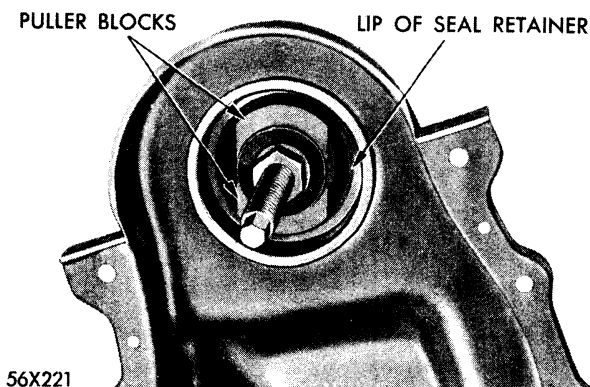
Puller Blocks Expanded to Correct Pulling Position
